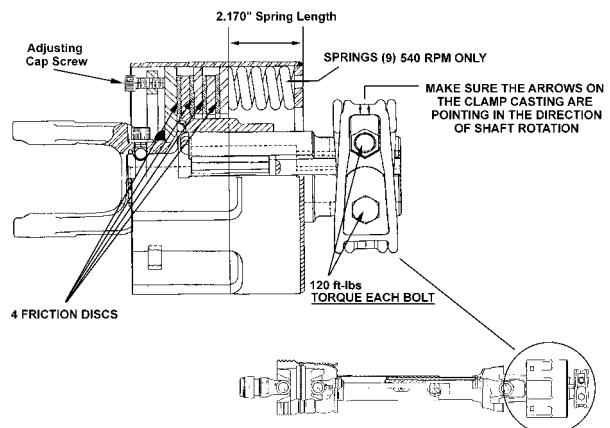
"MULTI DISC" PTO SLIP CLUTCH
